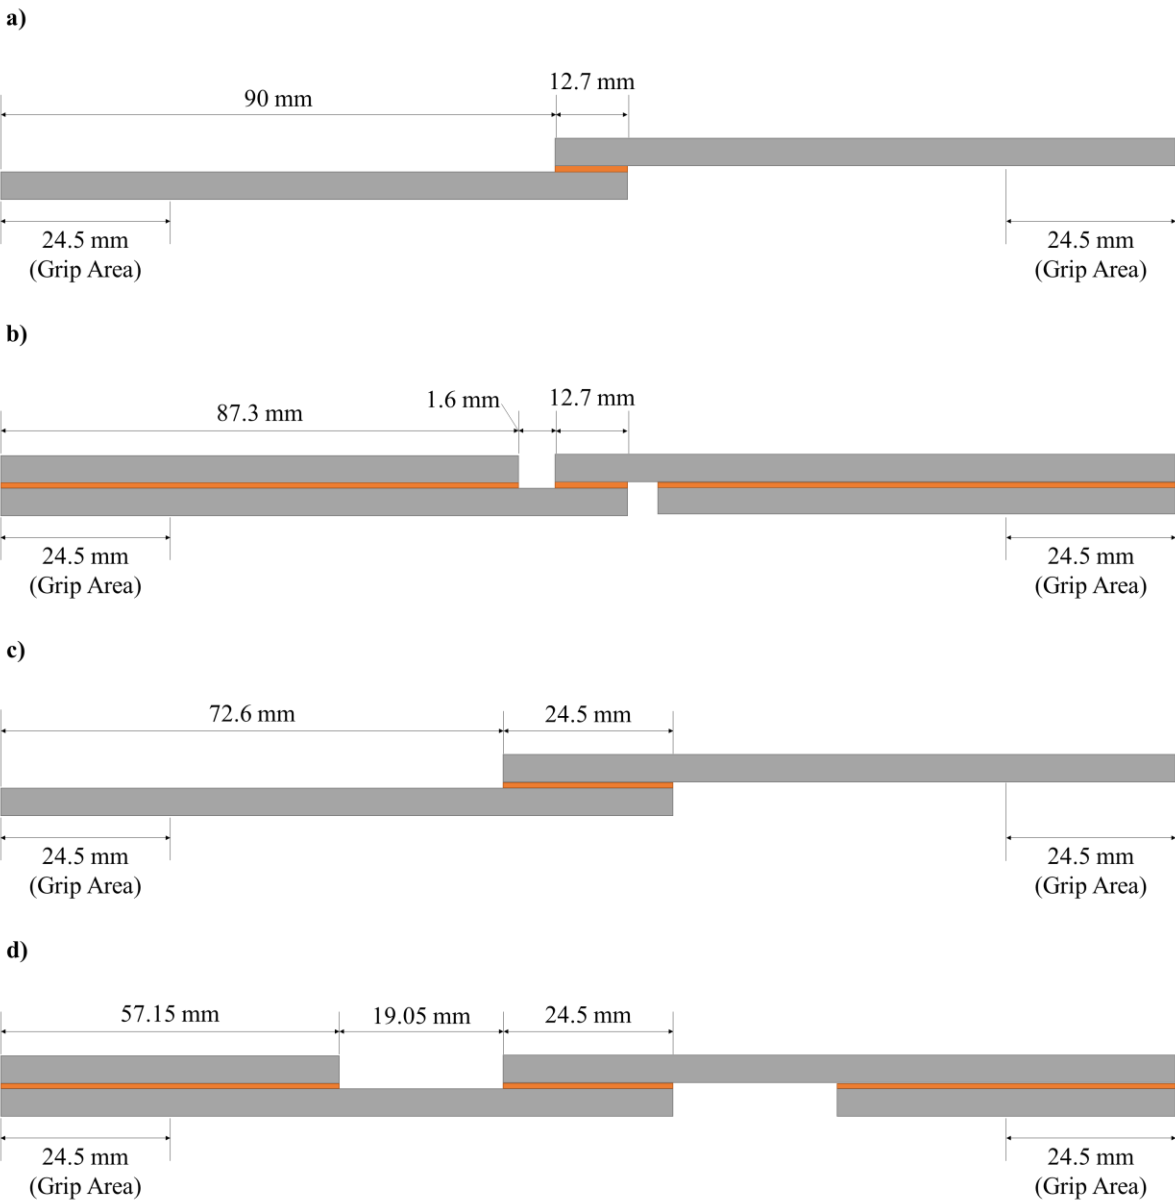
Different types of single lap shear specimens based on standards: (a) ASTM D 1002-10, (b) ASTM D 3165-07, (c) ASTM D 5868-01, (d) Modified ASTM D 5868-01.
